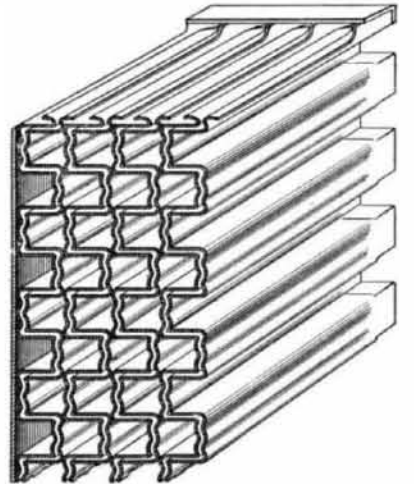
RADIATOR FORMED OF CORRUGATED METAL SHEETS.
